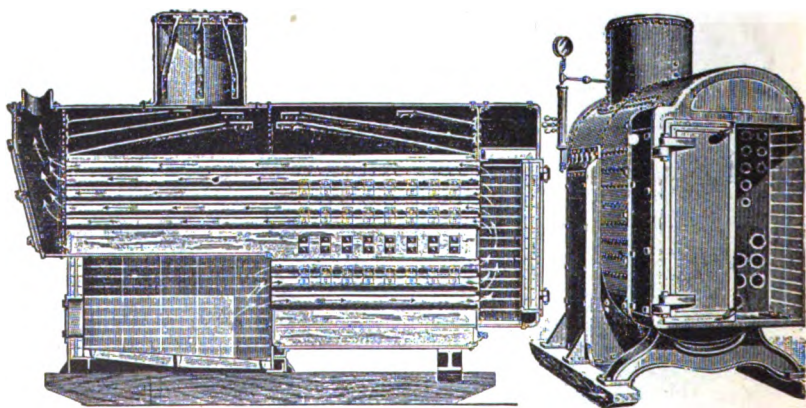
THE "ECONOMIC" BOILER.—SECTIONAL VIEW.
